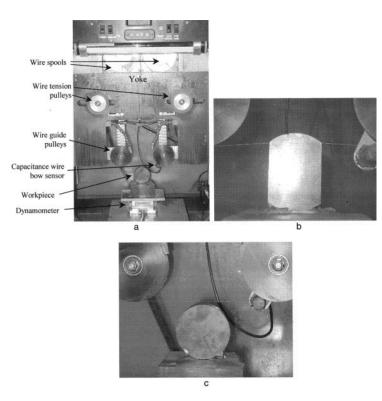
Experiment setup for diamond wire saw cutting of SiC: (a) machine setup, (b) baseline test of 50-mm wide sample (Experiment I), and (c) wire cutting of 75 mm diameter SiC wafer (Experiment II).
